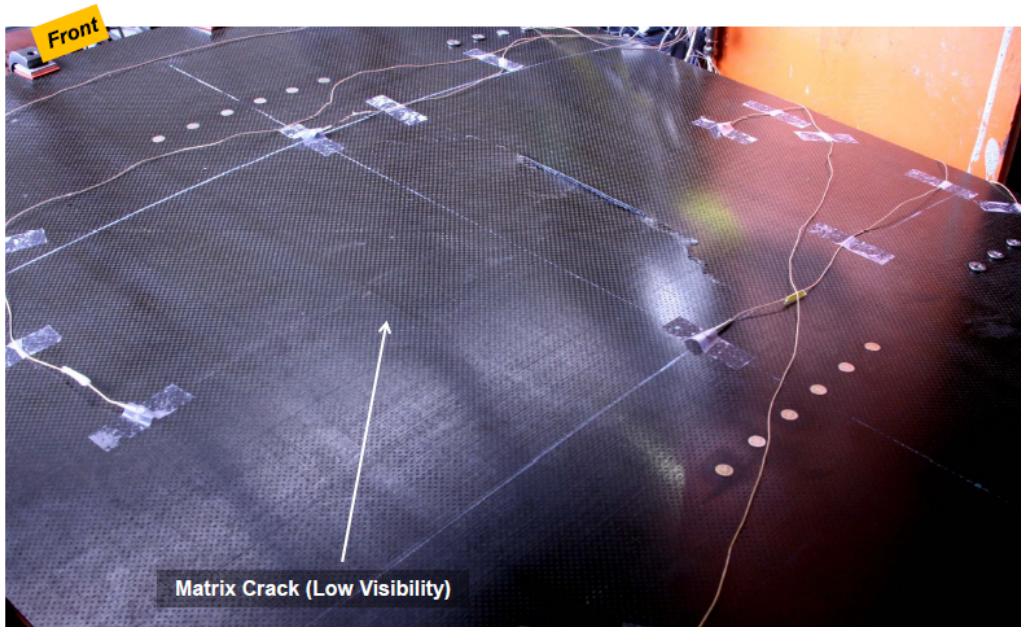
Post-Test State of Stringer05 Showing Surface Cracks Along the Stringer Radius Locations Adjacent to the Impact Location
